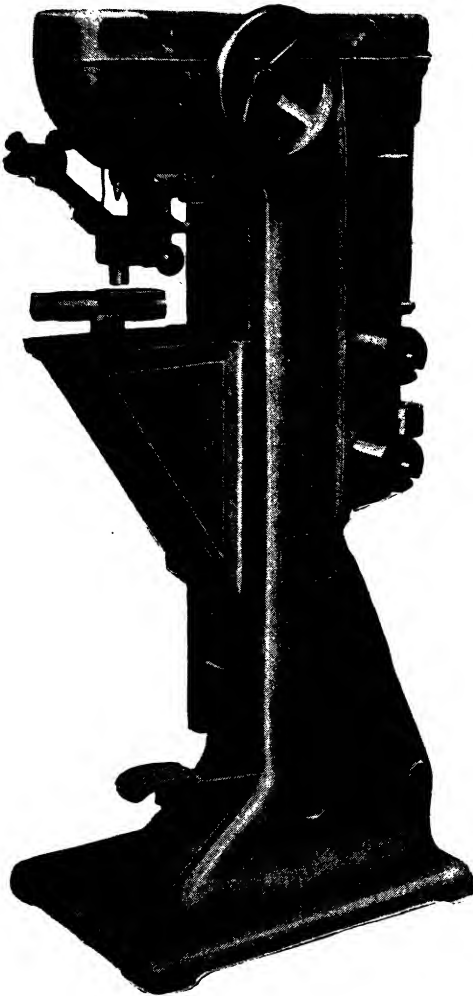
B. VICKERS HARDNESS TESTING MACHINE
